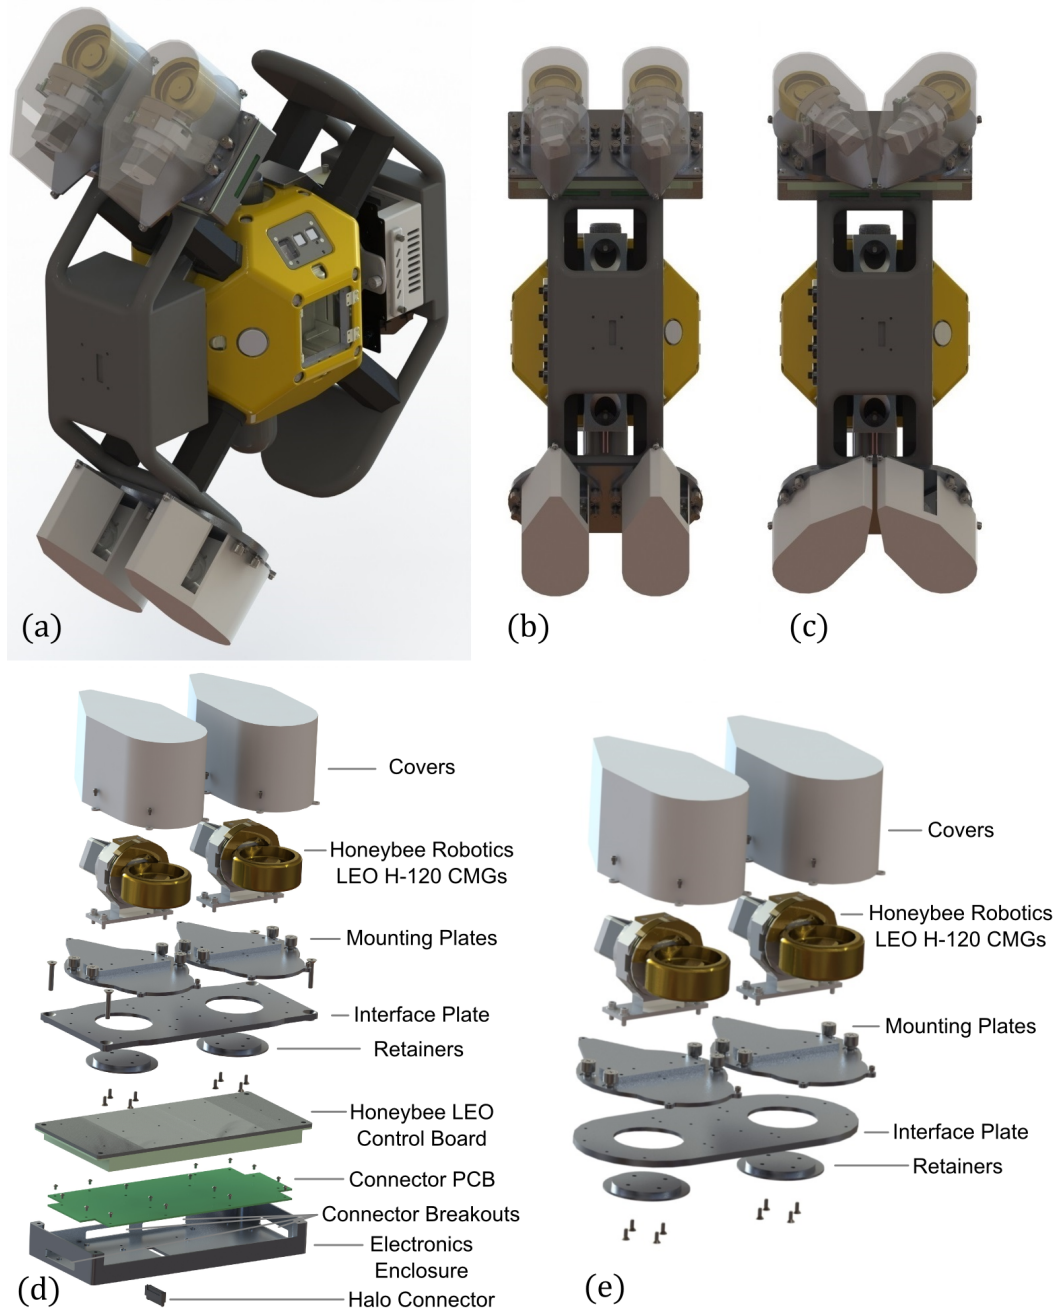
Mechanical design for SPH-Halo-CMG. (a) and (b) The CMGs attached to Halo in the Box-90 configuration. (c) The CMGs attached to Halo in the pyramid configuration. (d) An exploded view of the top CMG assembly. (e) An exploded view of the bottom CMG assembly. Image credit: Tim Setterfield [1].
